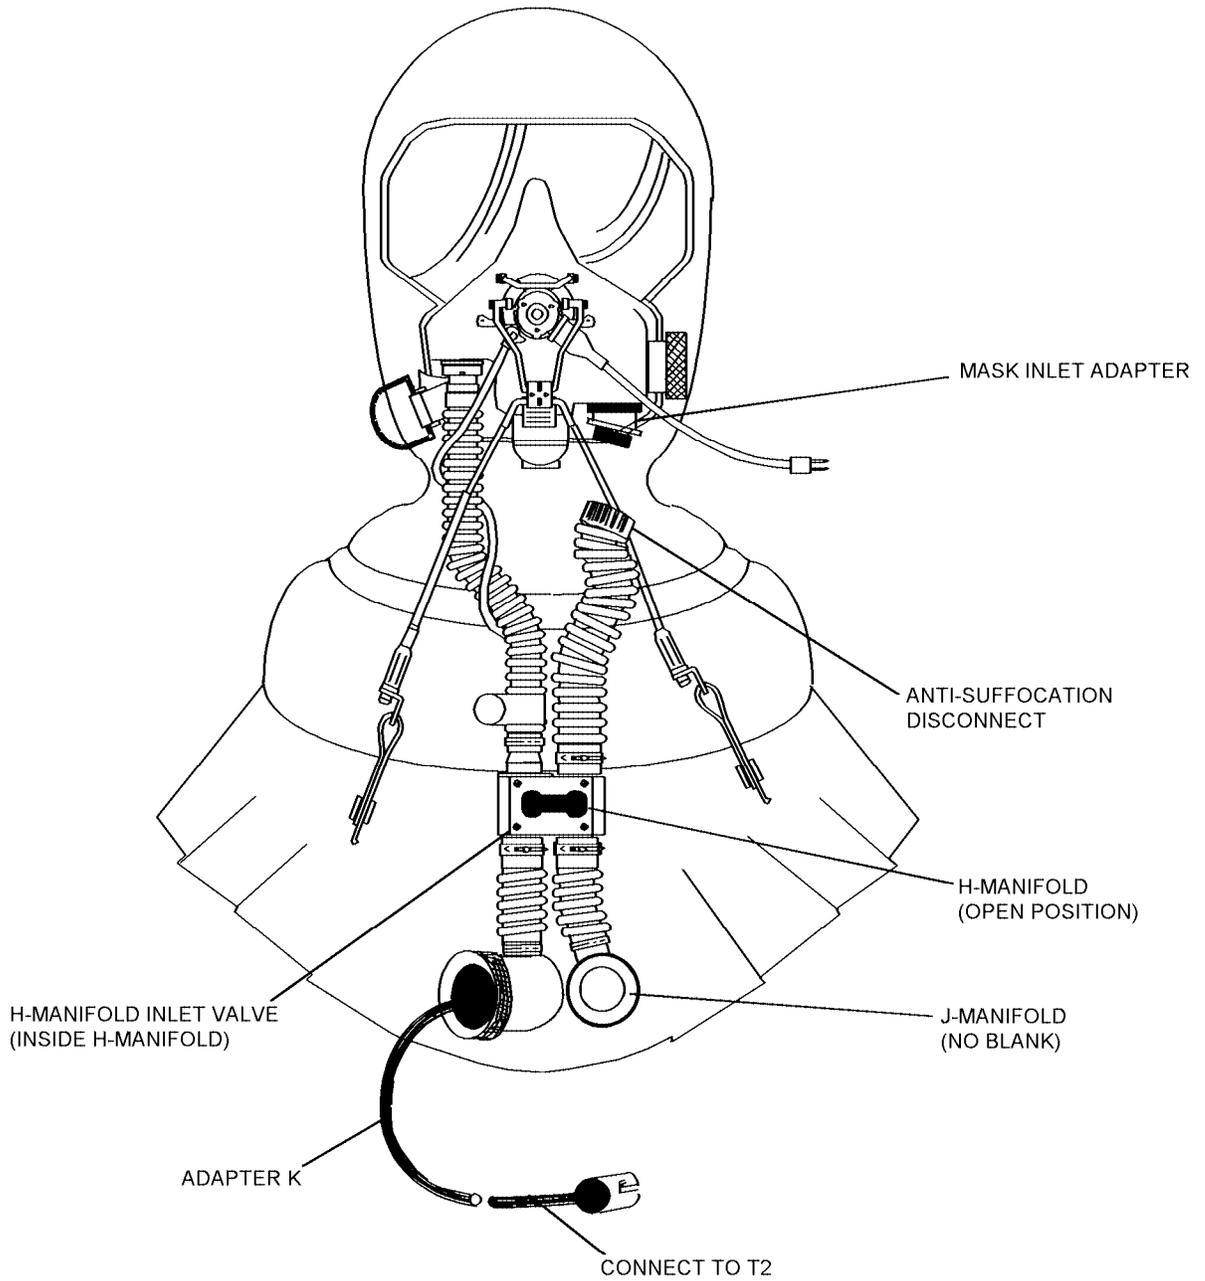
(V)2 thru (V)4 Variants - H-Manifold Inlet Valve - Reverse Leakage Test
